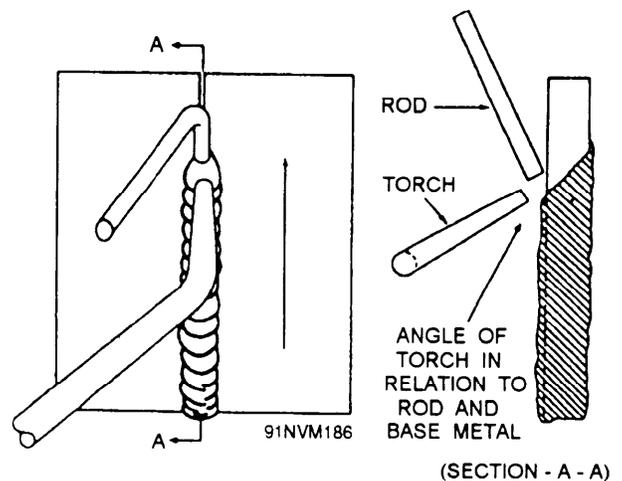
Welding a butt joint in the vertical position.
